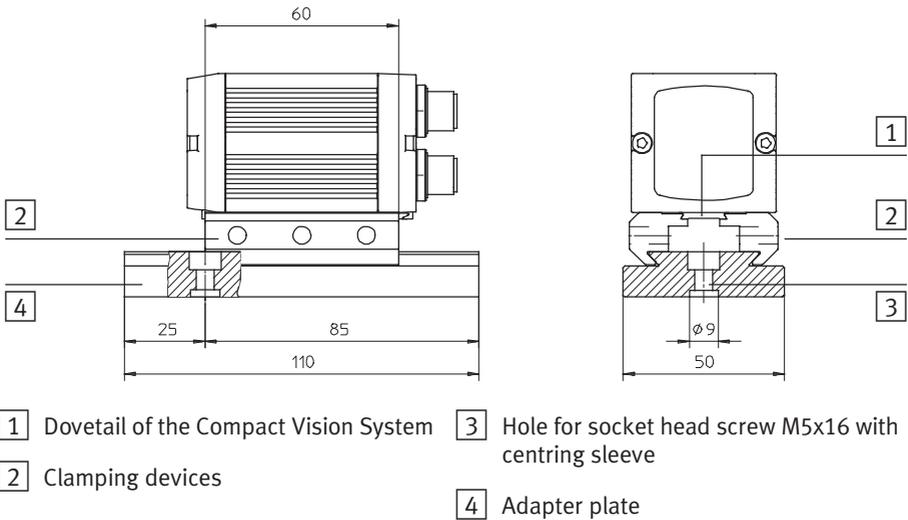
/3: Mounting with adapter kit type SBOA-HMSV-39
